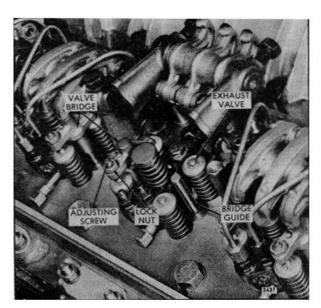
Location of Exhaust Valves (Four-Valve Cylinder Head)
